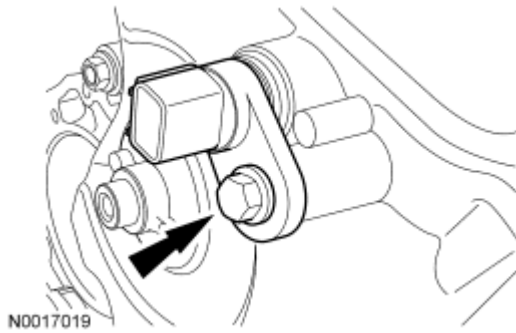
Locating Camshaft Position (CMP) Sensor And Bolt
